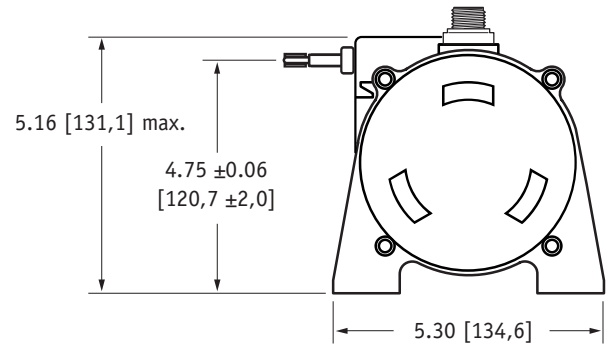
Outline Drawing (18 oz. cable tension only)
